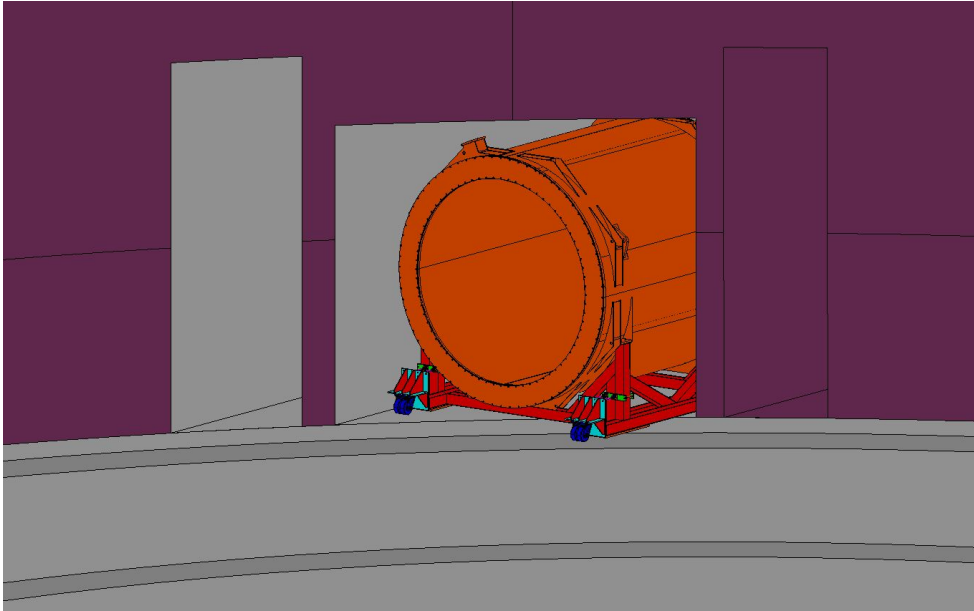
Moving CLEO cryostat through Hall A truck ramp wall opening.
